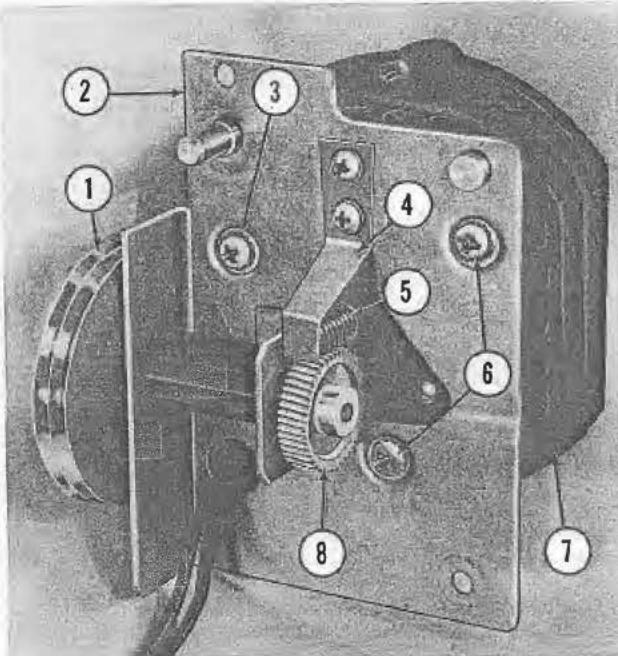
TURNTABLE DRIVE GEAR ADJUSTMENT
